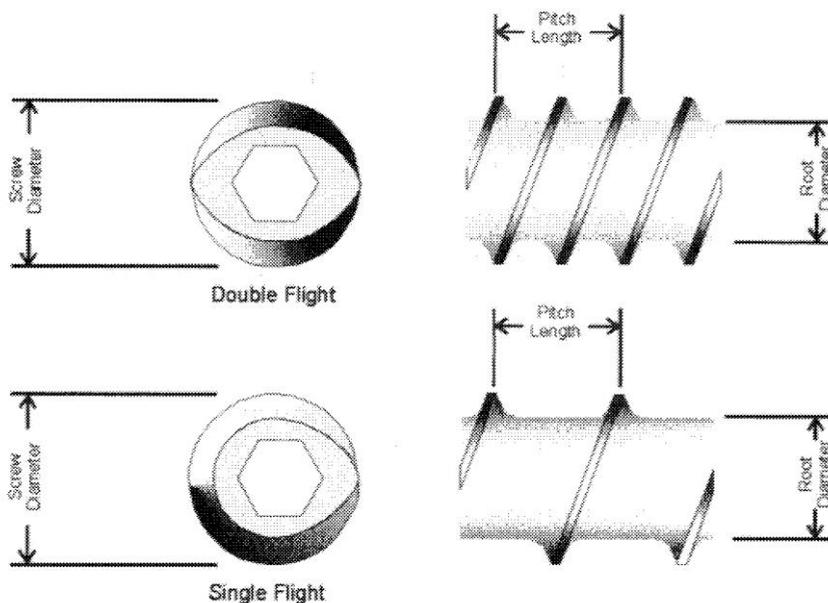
Screw terminology (courtesy of Wenger Manufacturing Co., Sabetha, KS).
